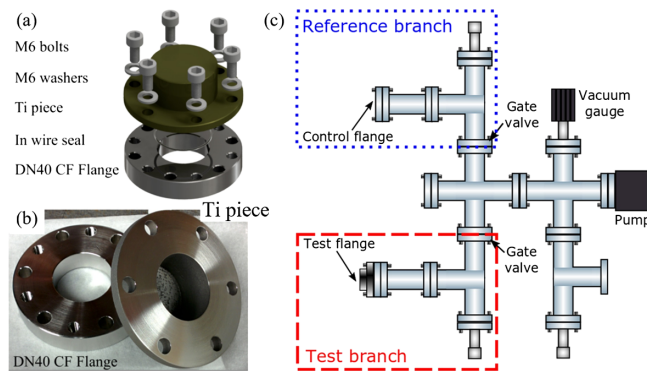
(a) 3D model and (b) photograph of vacuum flange assembly with additively manufactured Ti6Al4V test piece and (c) schematic diagram of the experimental setup for vacuum testing [149].
